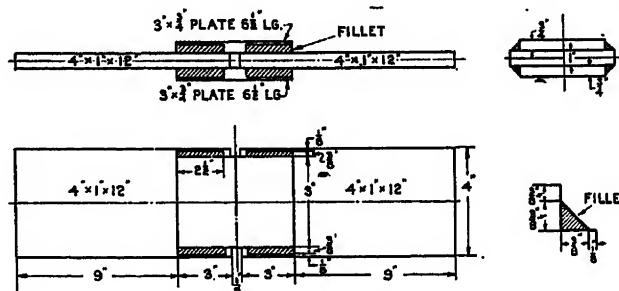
TEST SPECIMENS FOR FILLET WELDS
